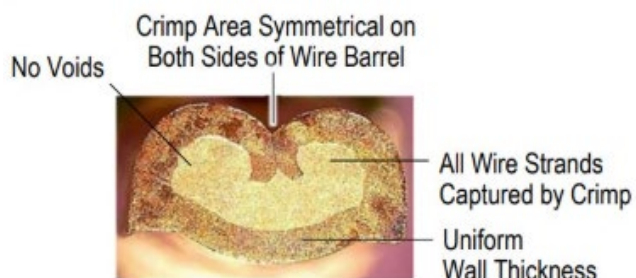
Example of Good Wire Crimp - Stamped & Formed Connectors
